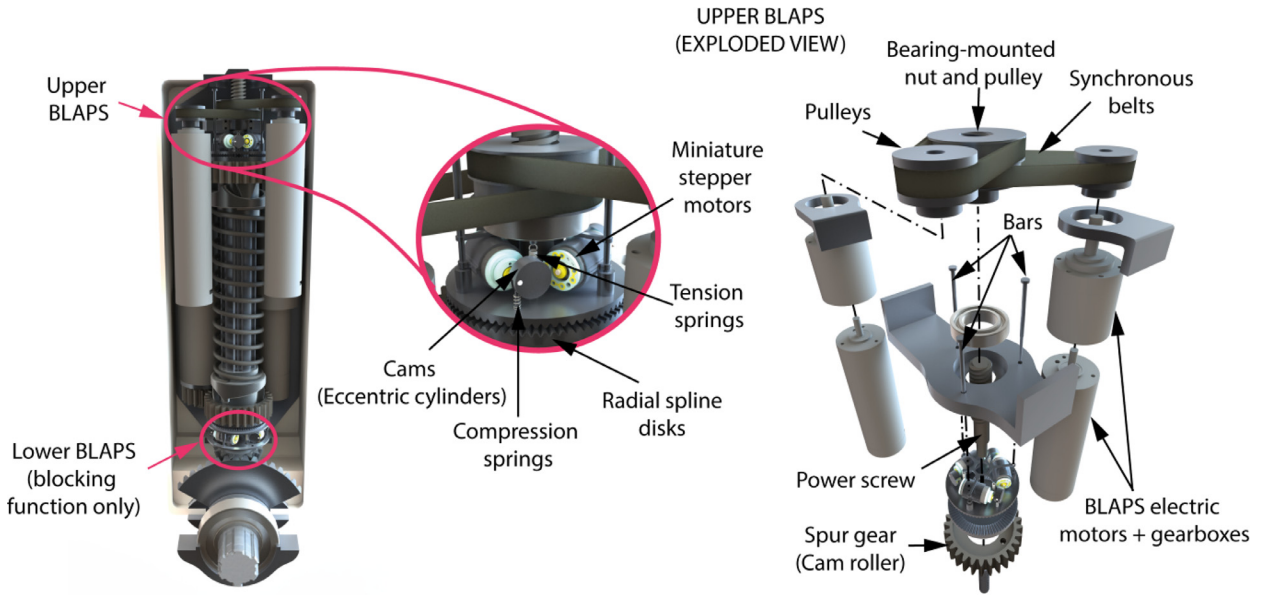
Mechanism and components of the BLAPS. Notice the details on the upper BLAPS: the zoomed view in the center and the exploded view at the right.
